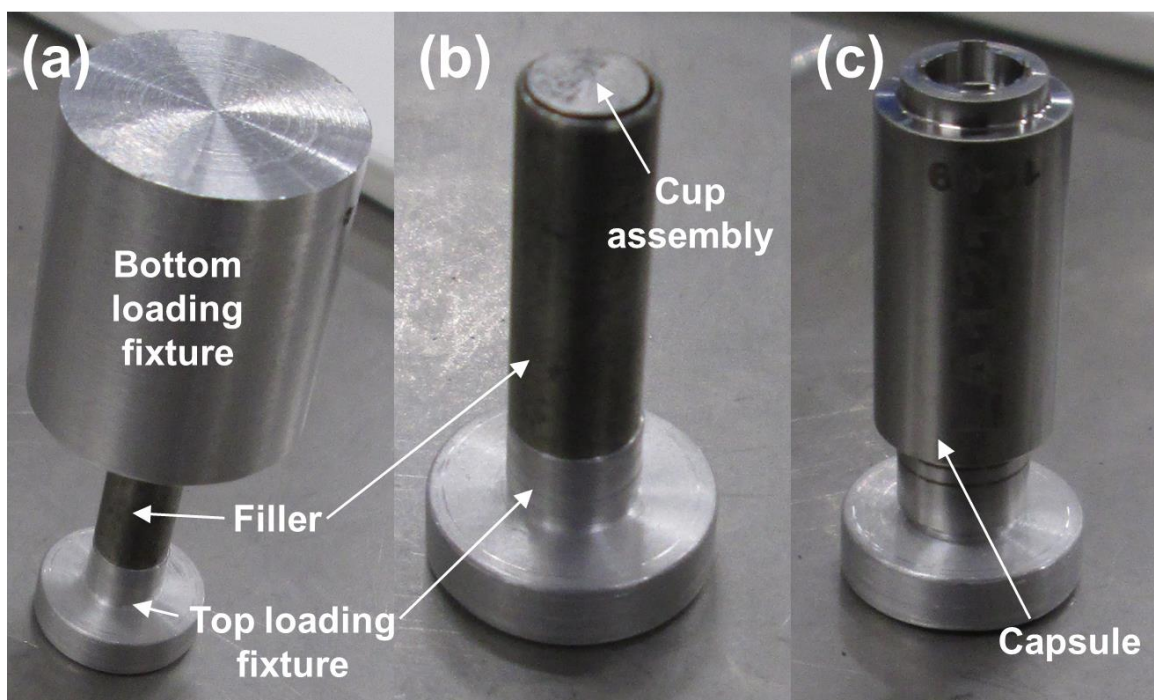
Filler placed over cup assembly and turned upside down while applying pressure with top loading fixture (a), bottom loading fixture removed (b), and capsule is turned upside down and placed over the tube and cup assembly (c).
